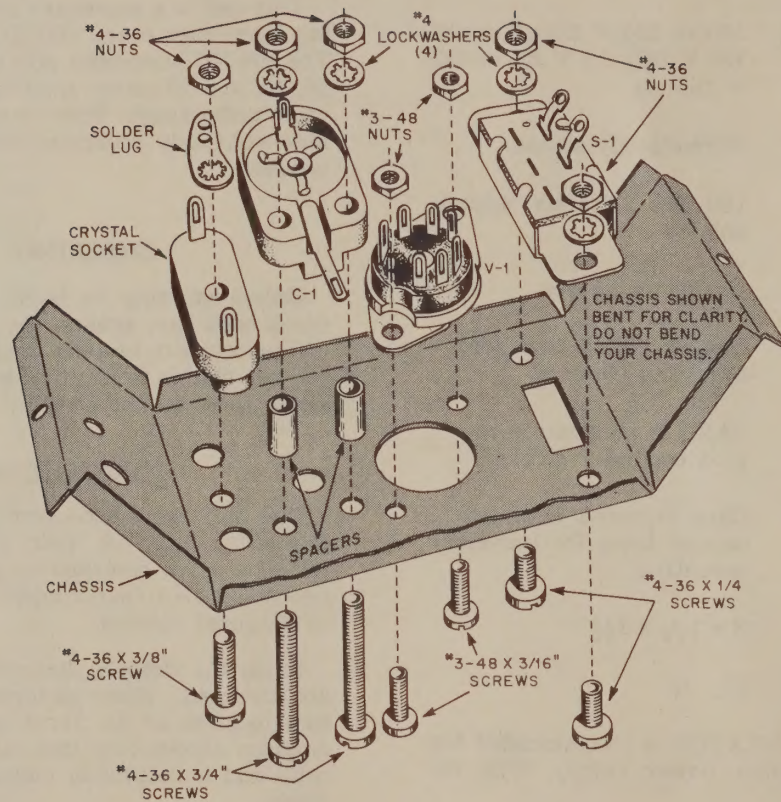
MOUNTING PARTS IN THE CHASSIS
